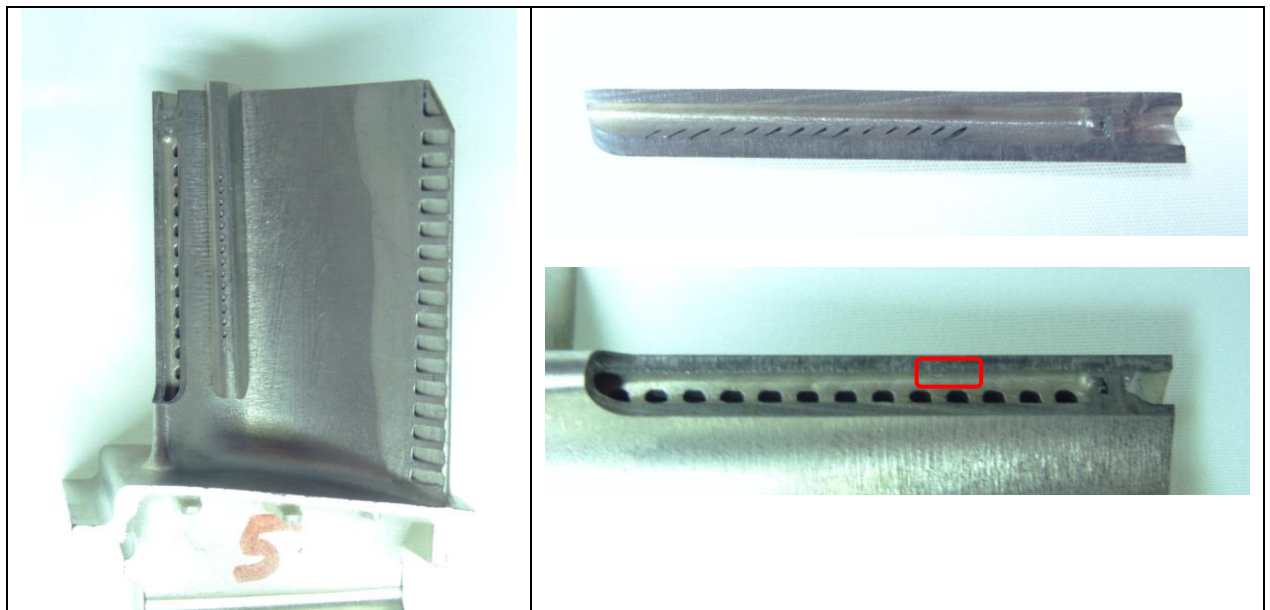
Fourteen holes drilled in Blade 4 with a 50µm nozzle and air as assist gas.
